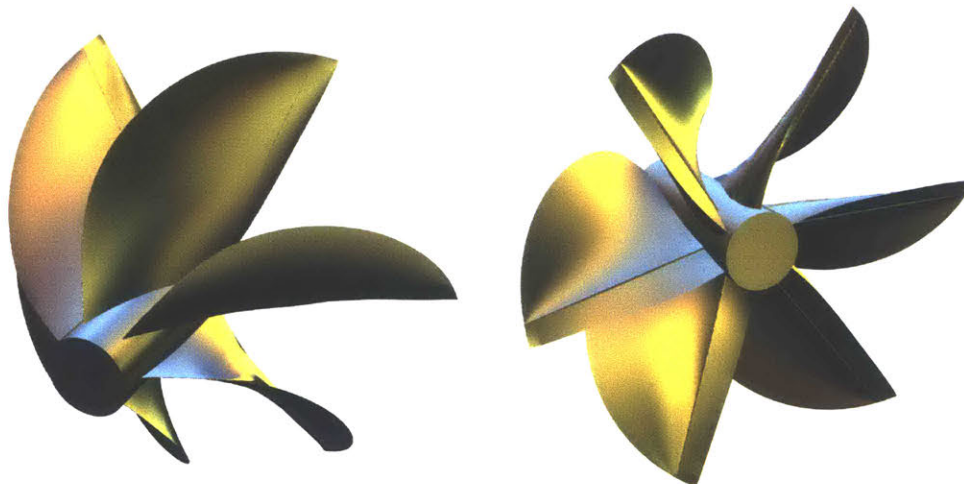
J5T* Propeller Final Design (isometric views)
